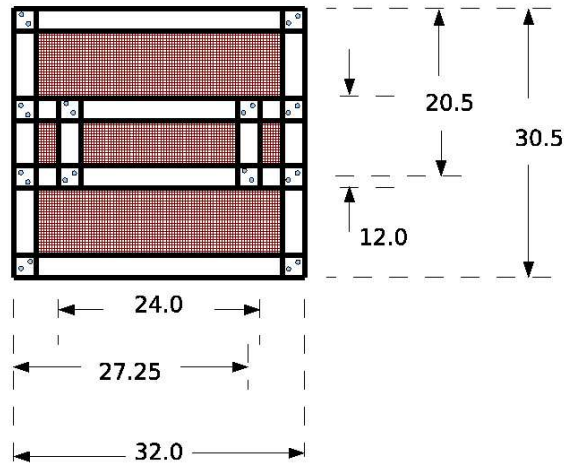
Mechanical drawing of the ends of the enclosure showing placement of the bulkheads.
